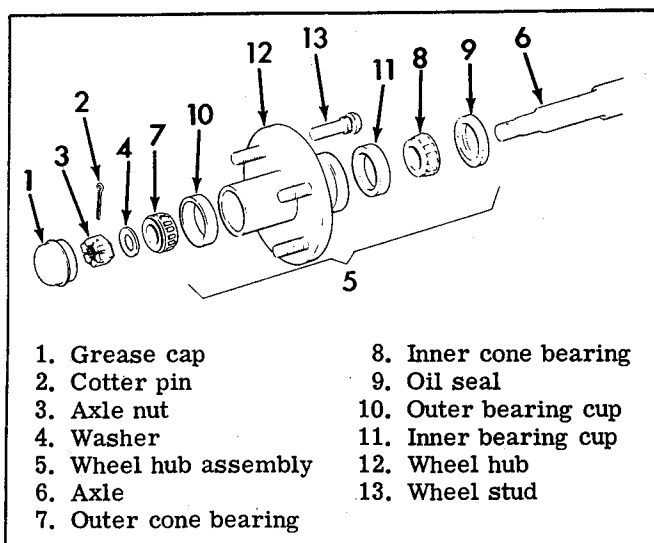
Front Wheel Hub, 4 Wheel Car - Exploded View
